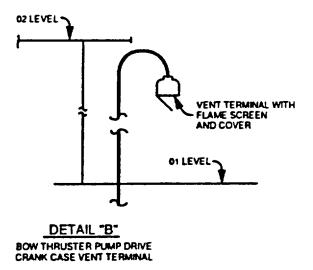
Engine Exhaust and Crankcase Vent System (Sheet 4 of 5).
